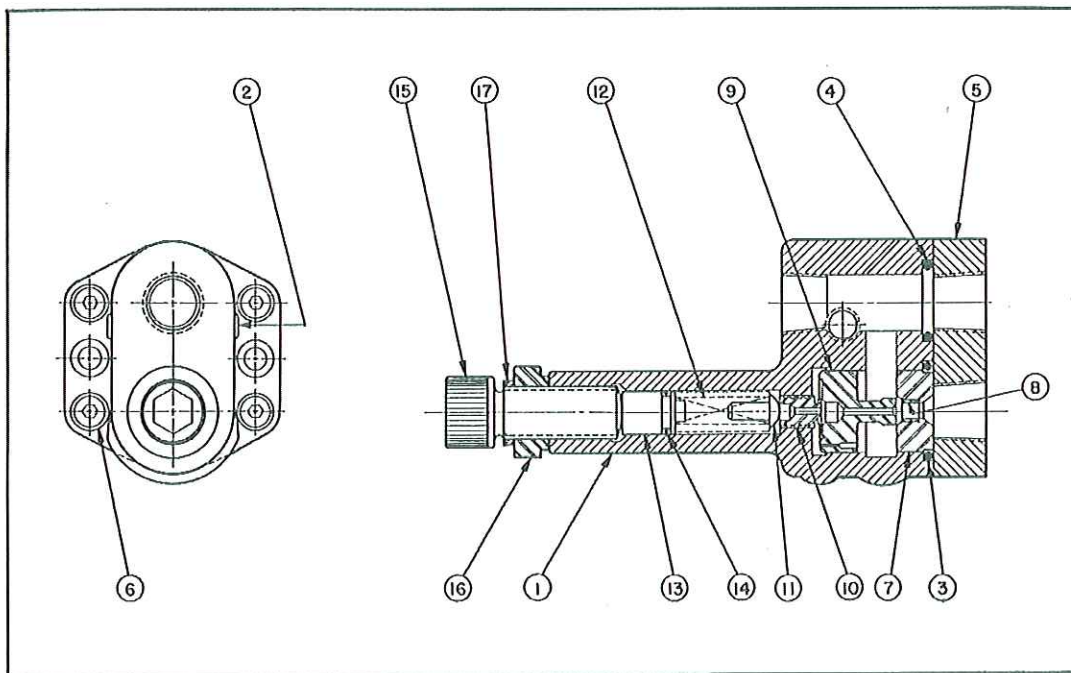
Cross-sectional drawing of Multipress Relief Valve.
